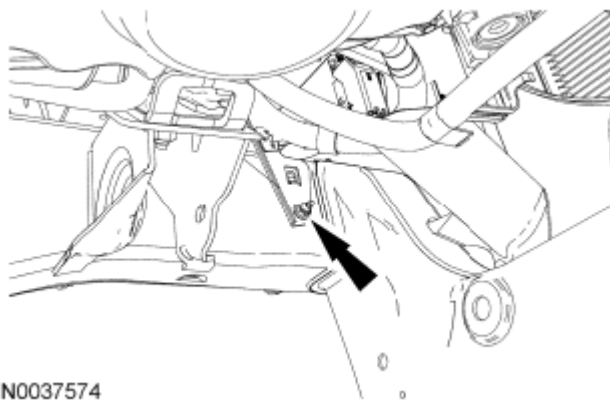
Locating Battery Cable Harness Bracket And Nut
